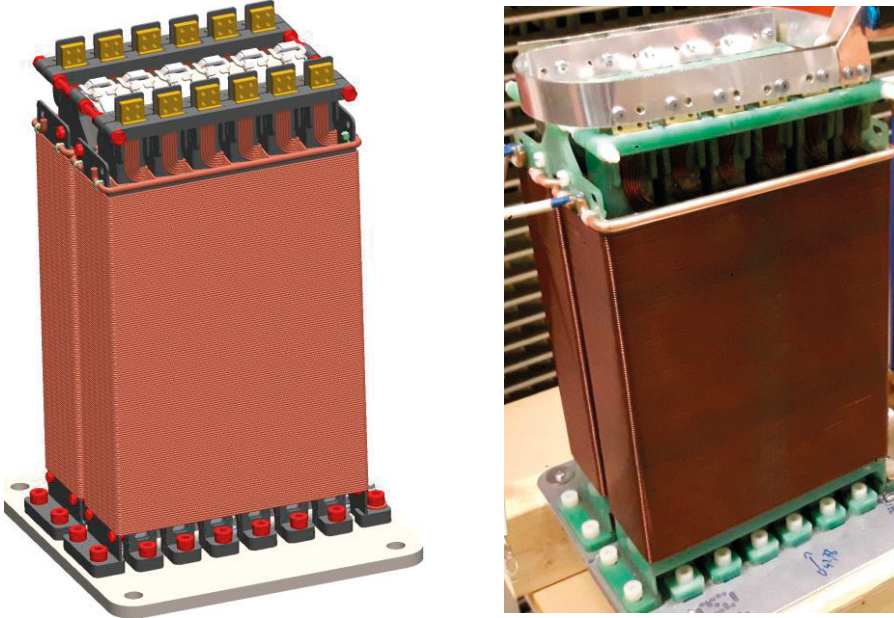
Overview of the developed split-core pulse transformer geometry- a) CAD drawing; b) built transformer.
